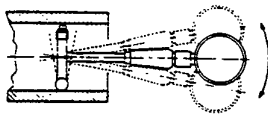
How to measure the minimum dimension in the axial direction of the bore
